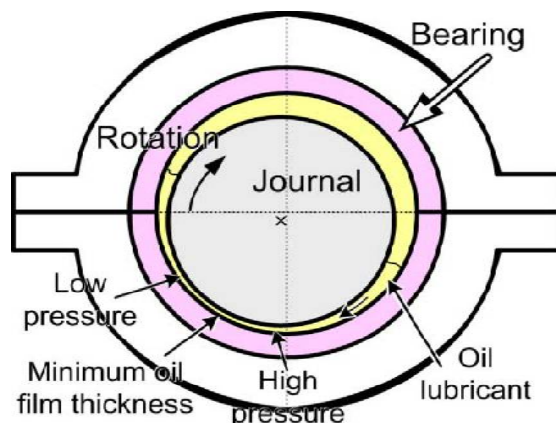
Schematic of oil-lubricated journal (sleeve) bearing^[1]
